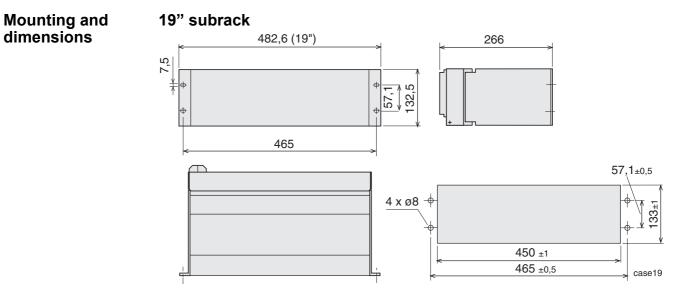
Dimensions (in mm) and panel cut-out for flush mounting
